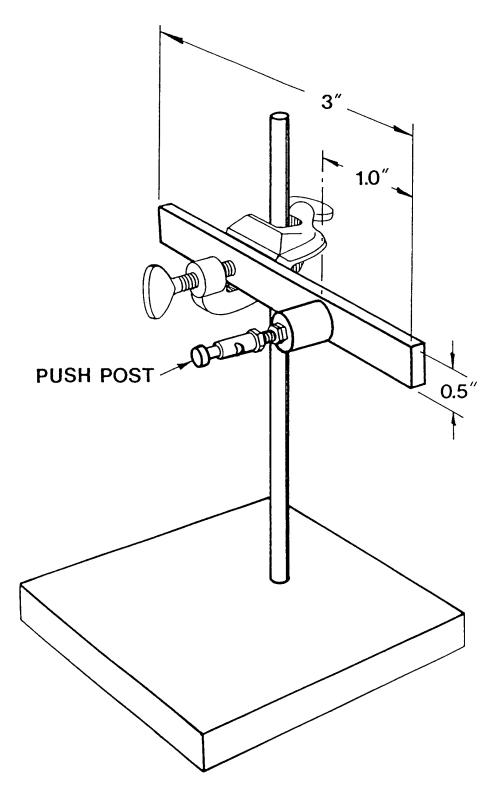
Lamp Mount Assembly for Test Set-Up
